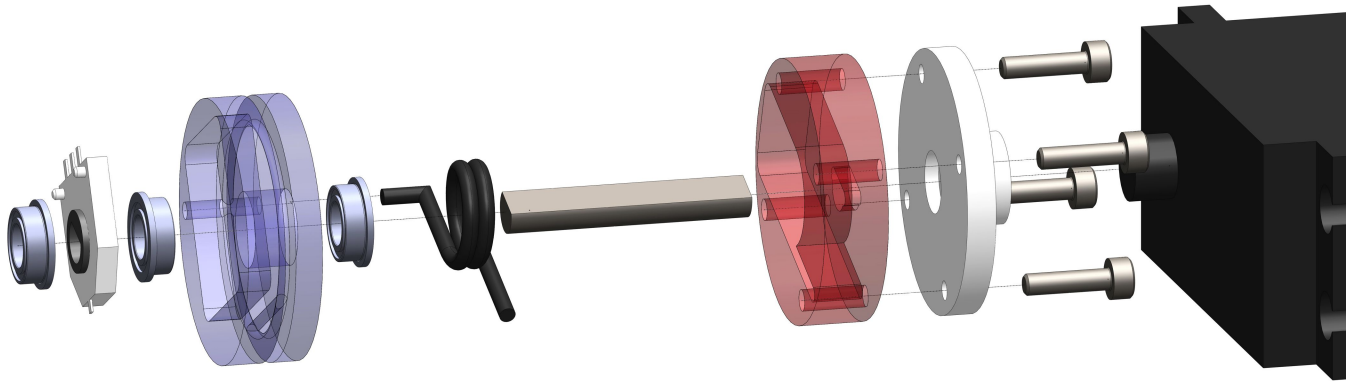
The exploded view of the ServoSEA. From left to right: ball bearing, potentiometer (white), ball bearing, cable drum (blue), ball bearing, spring (black), d-shaped axis, spring drum (red), servo disk (white), bolts, servo (black). The d-shaped axis, spring drum and servo disk are firmly connected and rotate as one. The cable drum can rotate while deflecting the spring, with the relative rotation between the drums measured by the potentiometer. The drums are strongest when machined from aluminum, but can potentially be 3D printed too.
